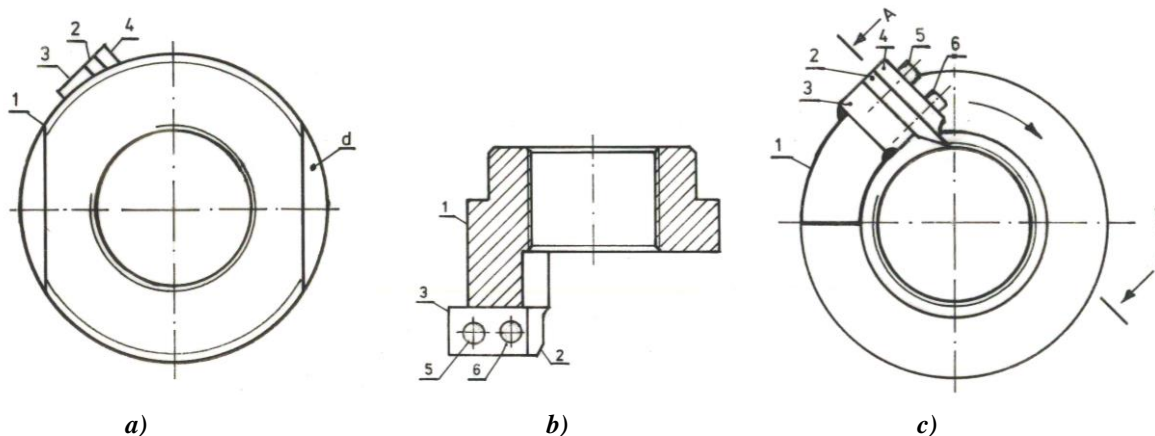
Views of the mill for the manufacture of wooden correction plugs. a) - Top view, b) - Section view, c) Bottom view. 1-cylindrical body, 2-profiled knife, 3-support, 4-press plate, 5,6-clamping screws.
